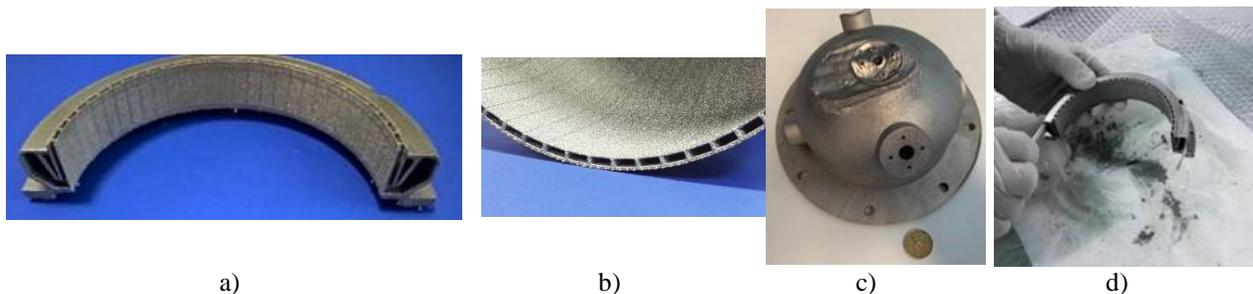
Printing experiments: manifold, combustion chamber, injector plate (erroneous supports design) ultrasonic cleaning
